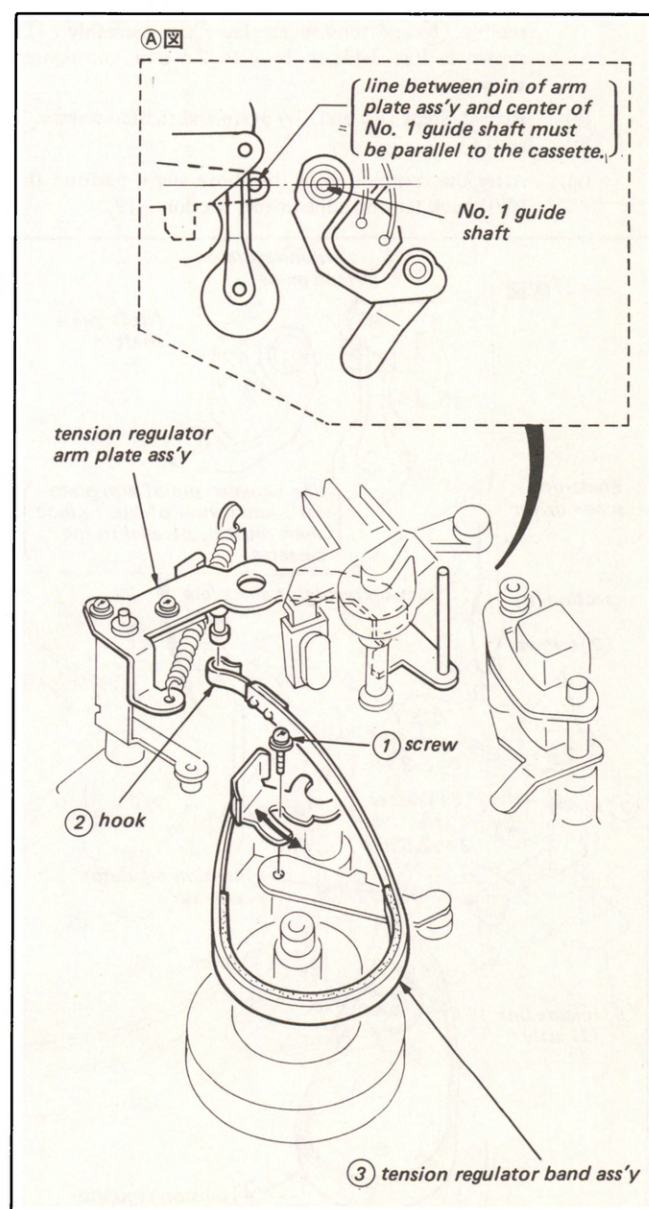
Replacement and adjustment of the tension regulator band assembly
